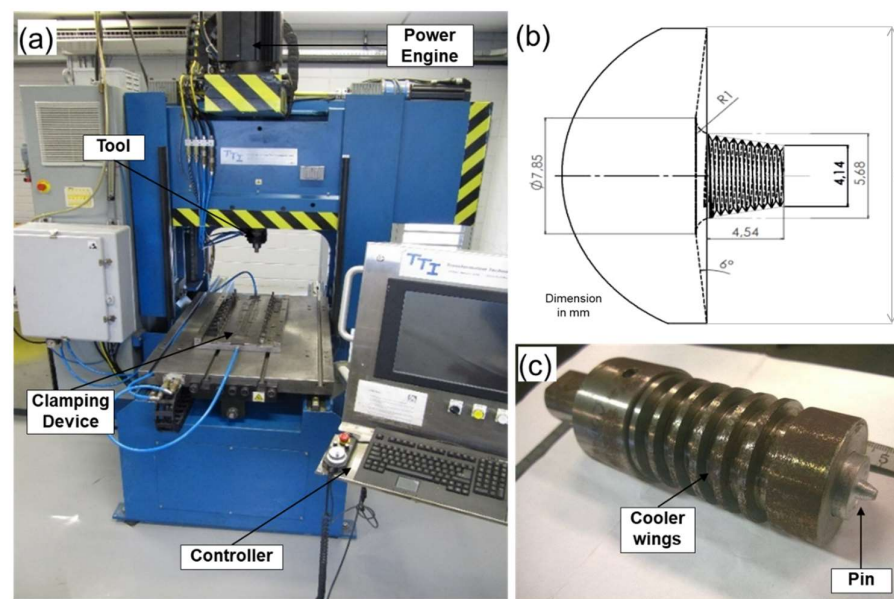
(a) FSW machine Transformation brand Technologies Inc.[®] (TTI) model RM1, (b) Geometry of the shoulder and tool pin and (c) tool for welding.
